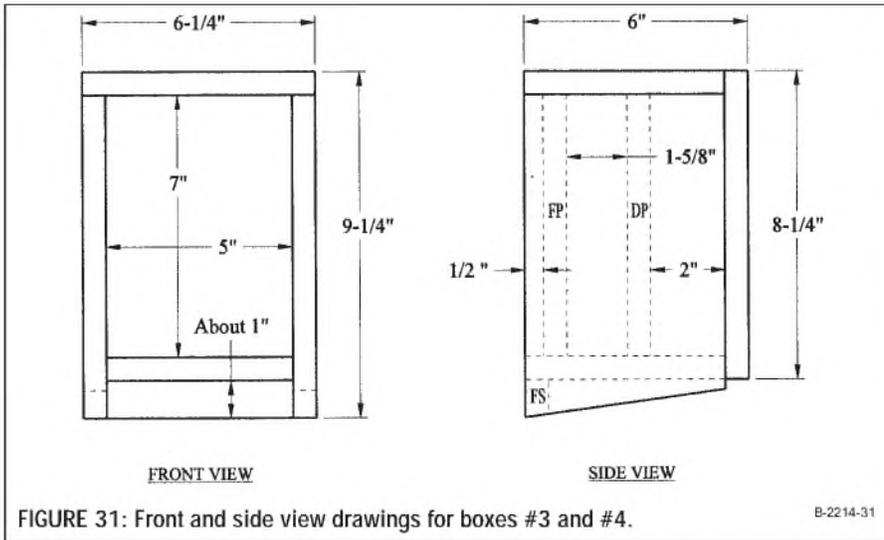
Front and side view drawings for boxes #3 and #4.
